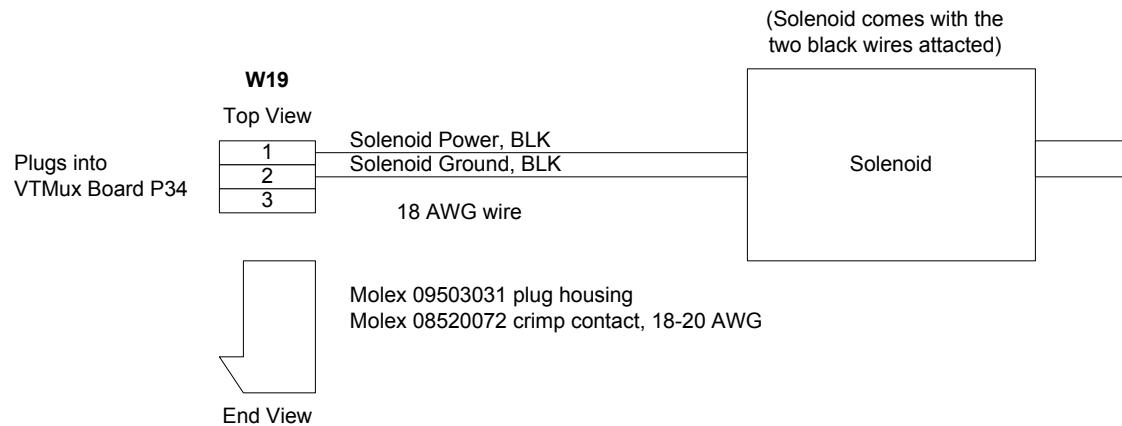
VTMUX BOARD P34 TO BRAKE SOLENOID
